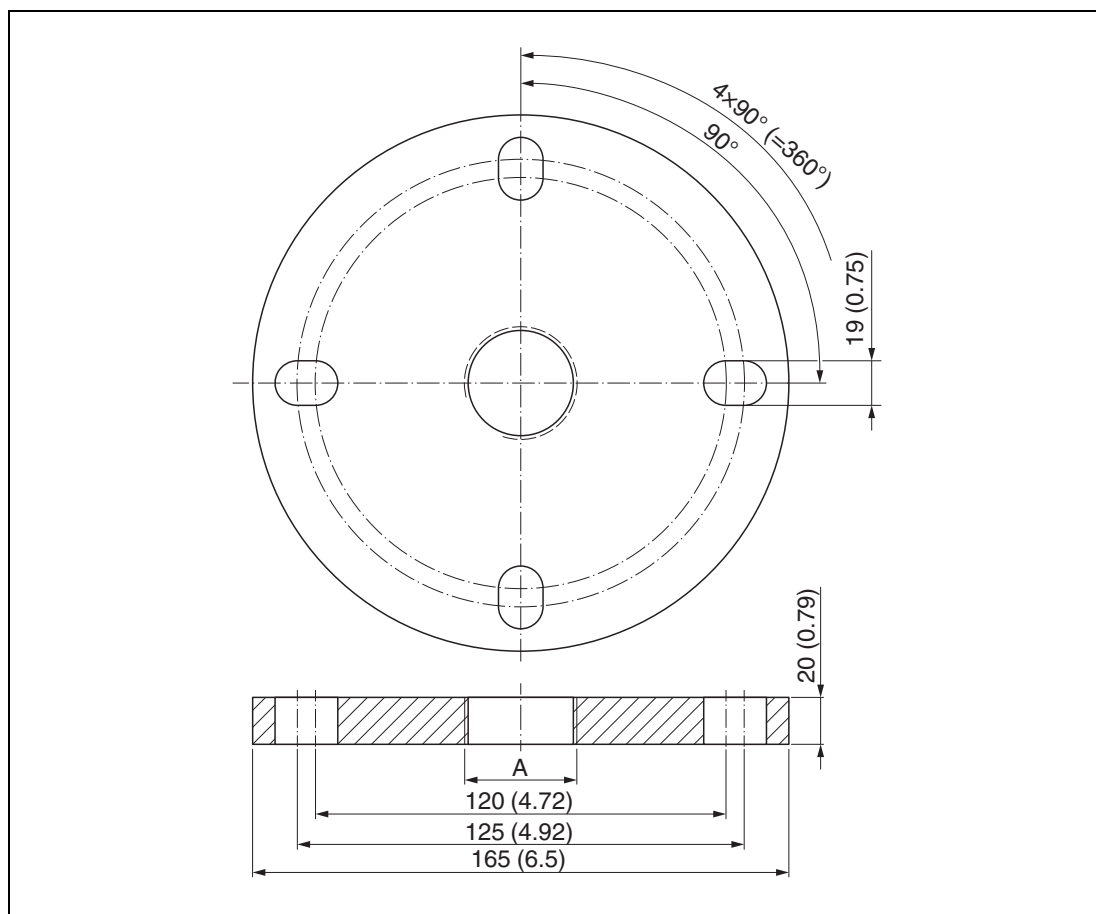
Dimensions of UNI flange 2 inch/DN50/50, engineering unit: mm (inch)
